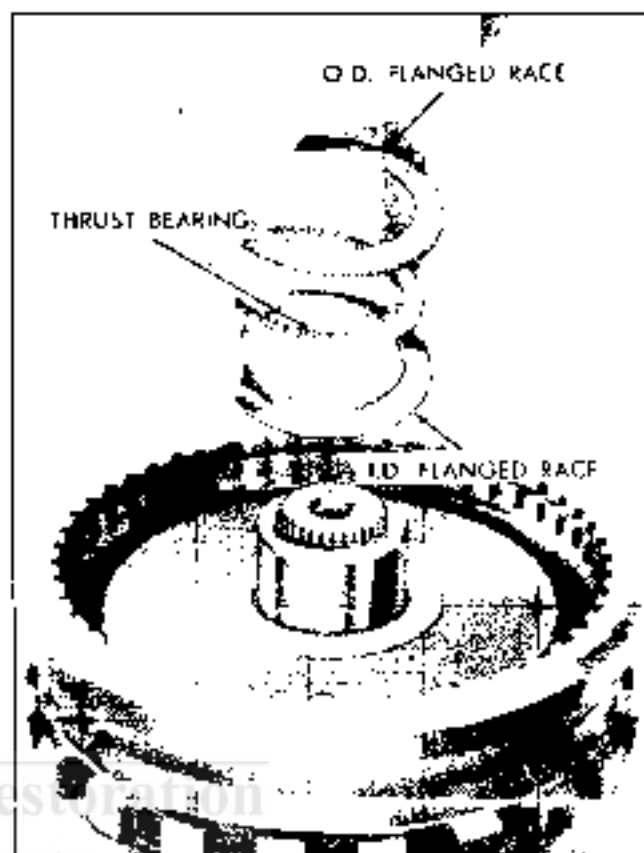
E-128—Installing Rear Internal Gear to Output Shaft Bearing and Races
